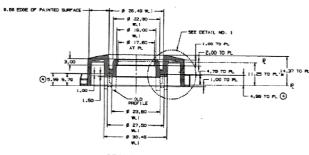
Part of Drawing Documentation of Prototype Component – TOP VIEW
